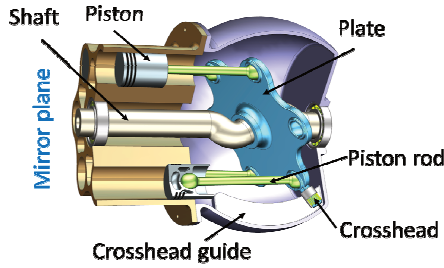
PAMAR-4 wobble plate (blocked by crosshead, half of the engine)
